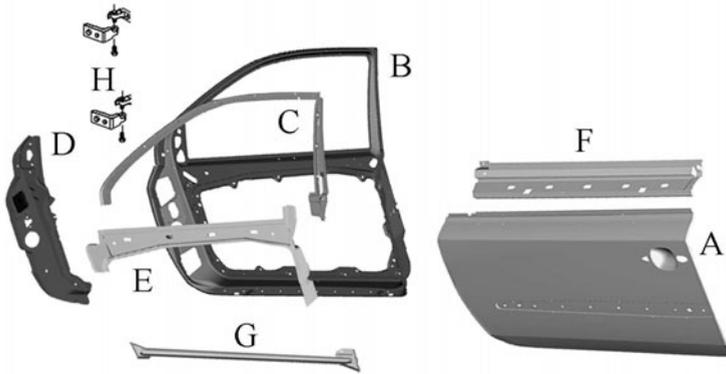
Typical components of a hybrid door: A) outer panel; B) inner panel; C) window frame reinforcement; D) hinges reinforcement; E) inner belt reinforcement; F) outer belt reinforcement; G) intrusion bar; H) hinges.
